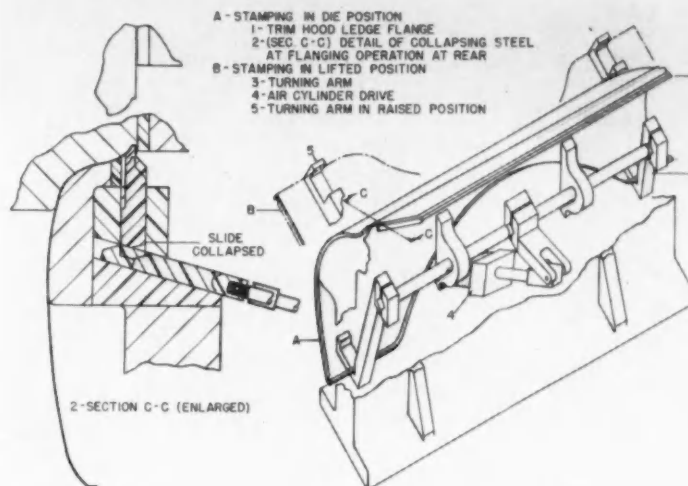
Die ejector mechanism in press No. 6, where the fender stamping is finish-trimmed
